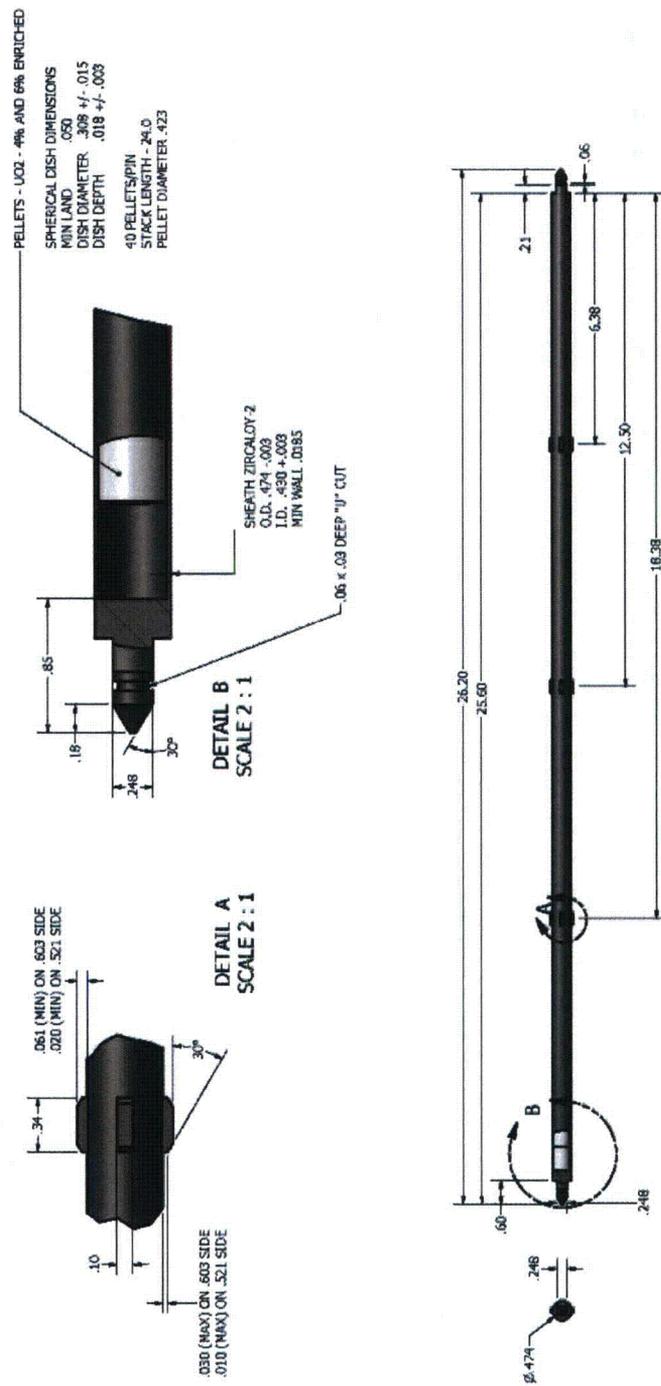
PULSTAR FUEL ASSEMBLY
